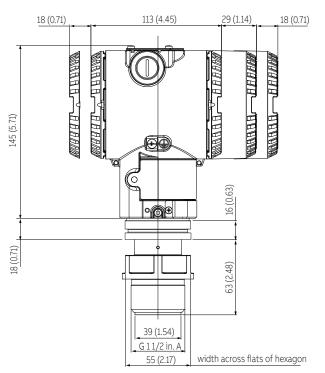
$\,\,$ 266HRH / 266NRH with barrel housing and direct mount seal S26KN pulp and paper 11/2 in. Gas threaded connections
